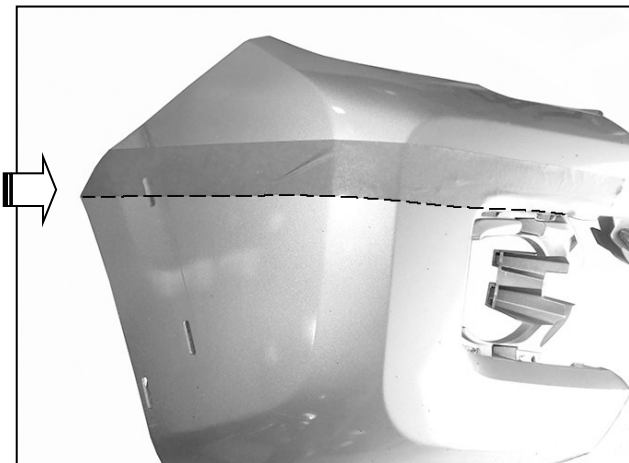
Passenger/right side of Bumper attached to Mounting Bracket
